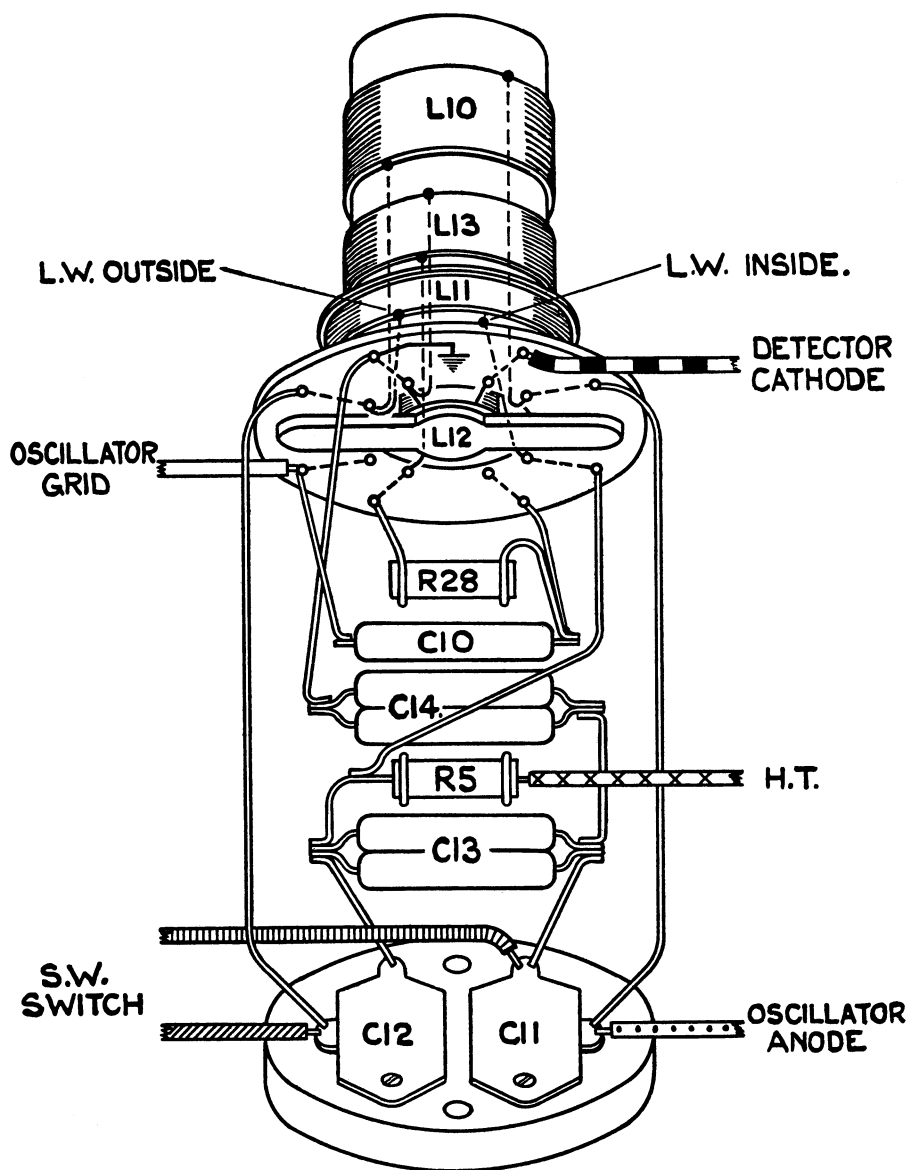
DETAILED VIEW OF OSCILLATOR COIL.
